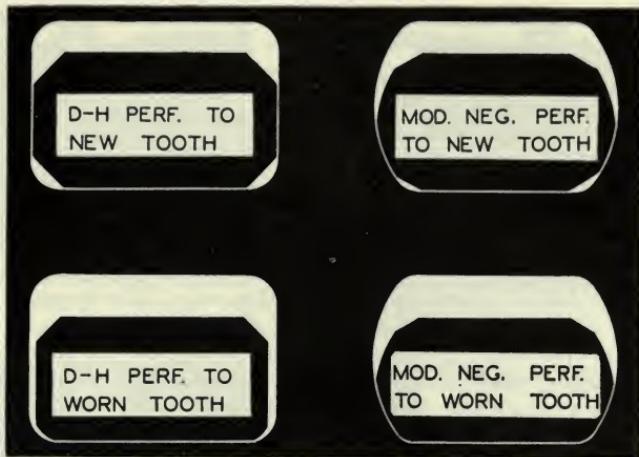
Drawing showing side clearance between perforation and guiding sprocket.
